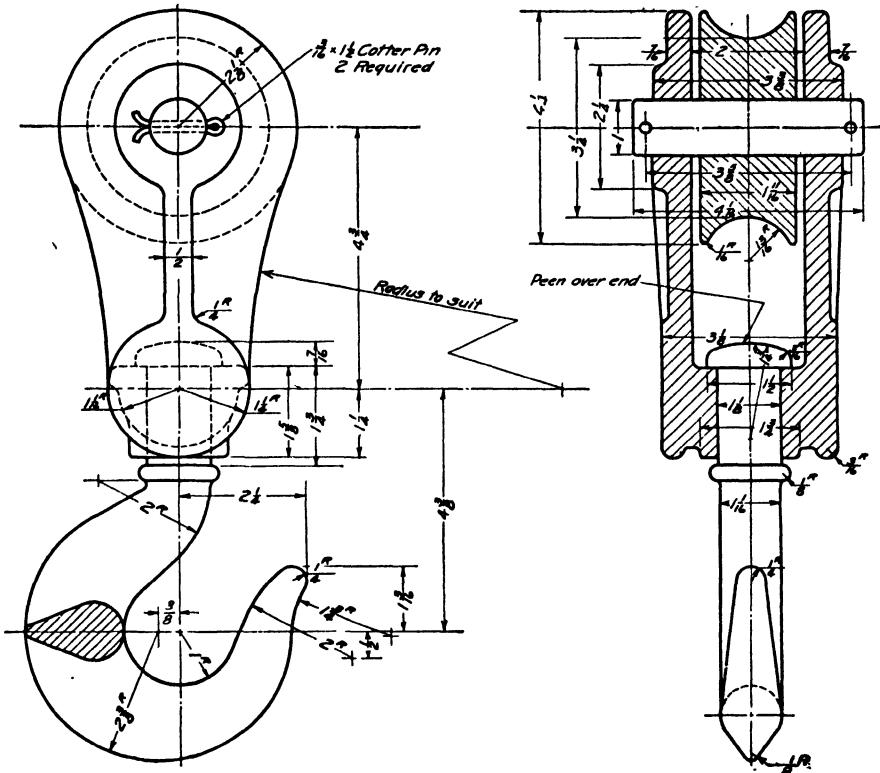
Prob. 301. Make detail drawings of the crane hook.
